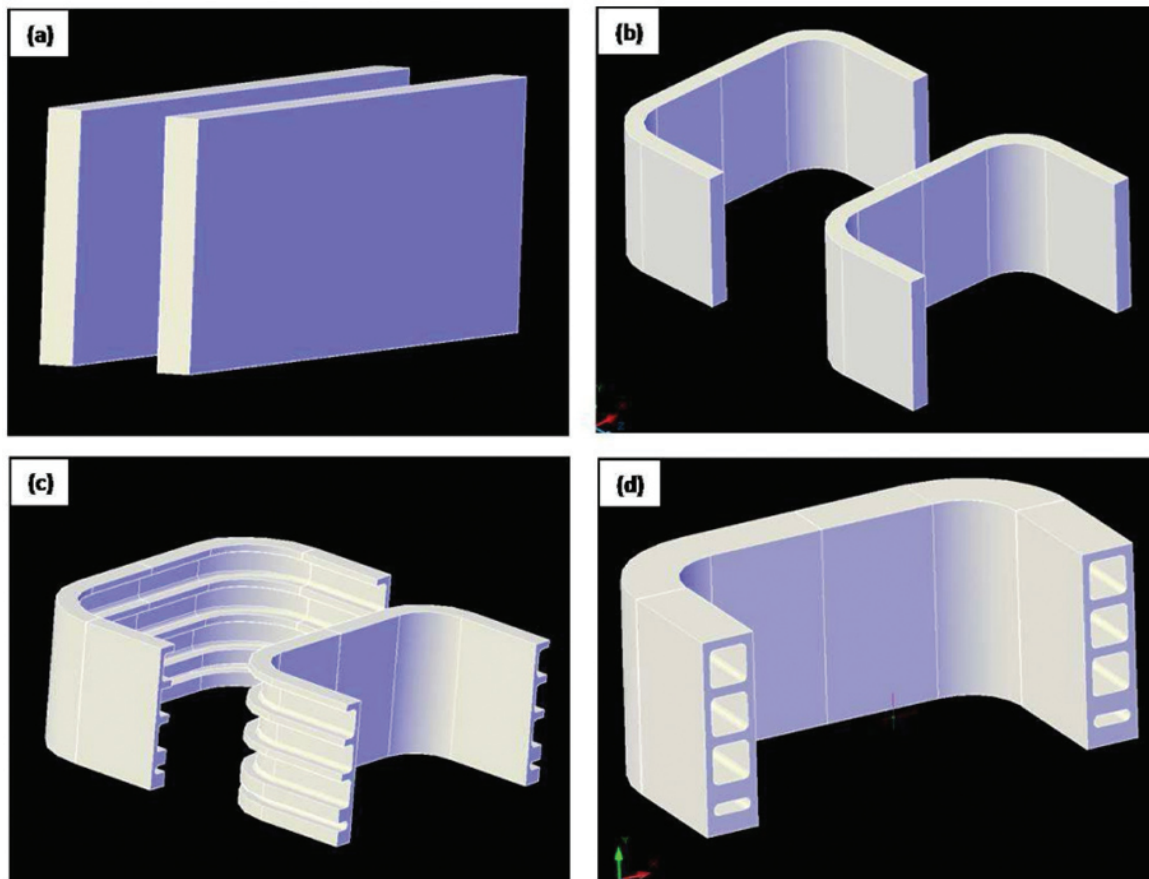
Concept of for TBMs-FW mock-ups development by HIP route: (a) Milled INRAFM steel plate (b) Bending of milled INRAFM steel plate into C/U shape (c) Milling of grooves on the internal and external surfaces of the C/U shape plates (d) Assembly and HIPing of C/U shape grooved plates.
